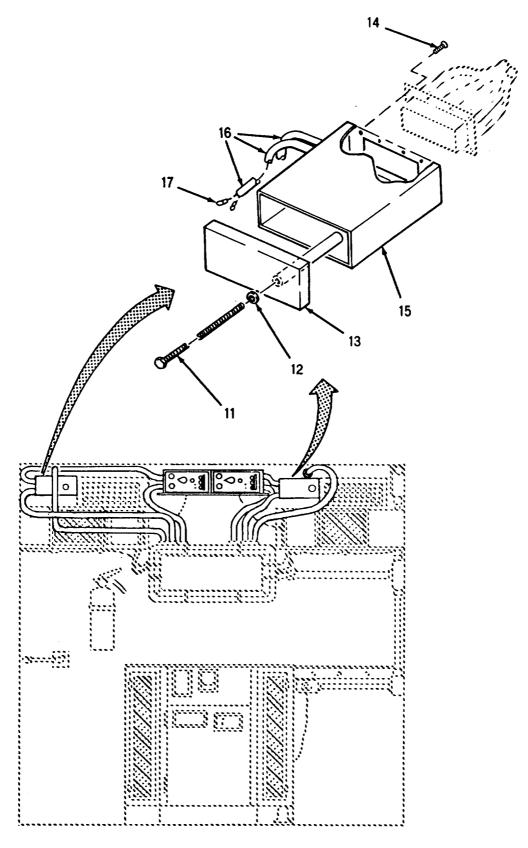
Environmental Control - Air Conditioner Control Assembly (Sheet 2 of 2)
